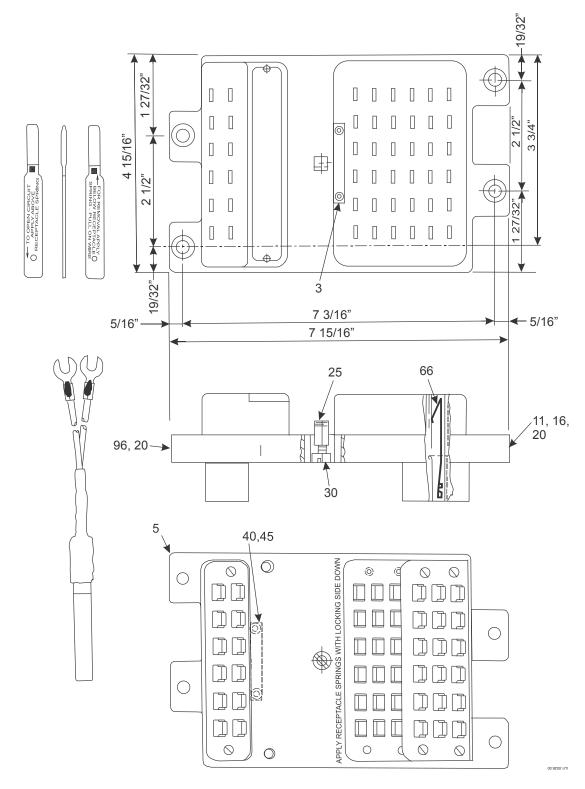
Parts Location for PV-250 Old Style Mounting Base (N376442)
